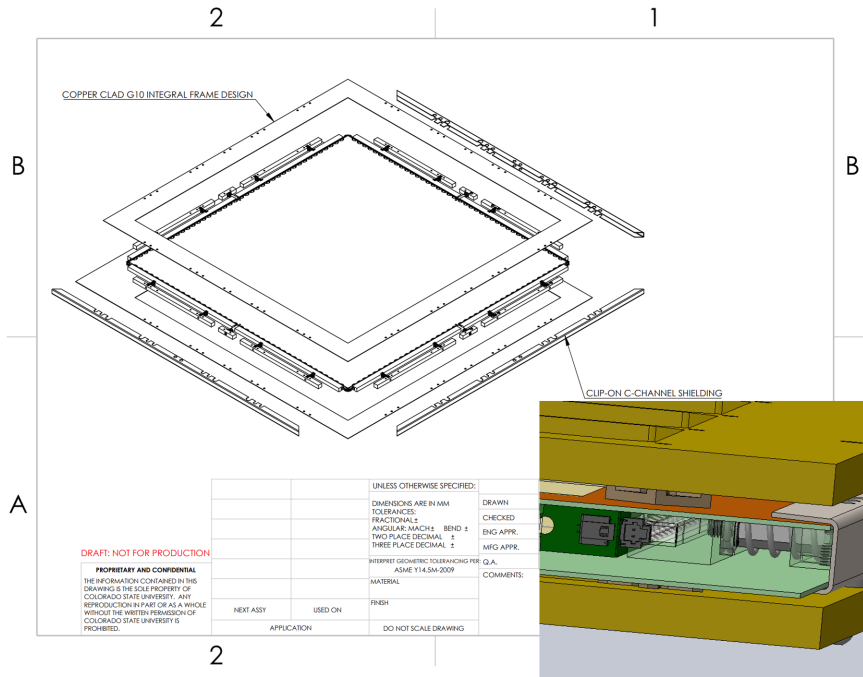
Copper-clad G-10 frames and formed stainless-steel external covers provide a 3-sided discharge shield for SiPMs.
